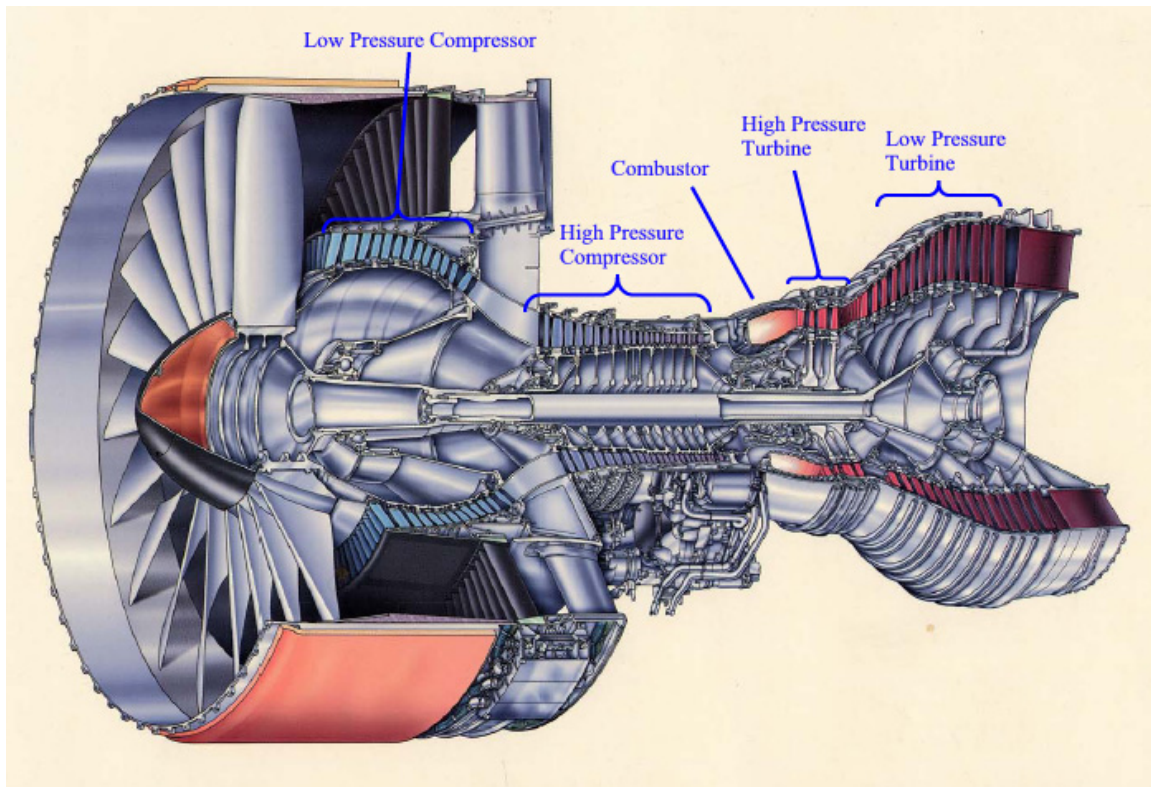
Cut-away view of Pratt & Whitney PW4000 engine showing low and high pressure compressor, combustor, and high and low pressure turbine.
